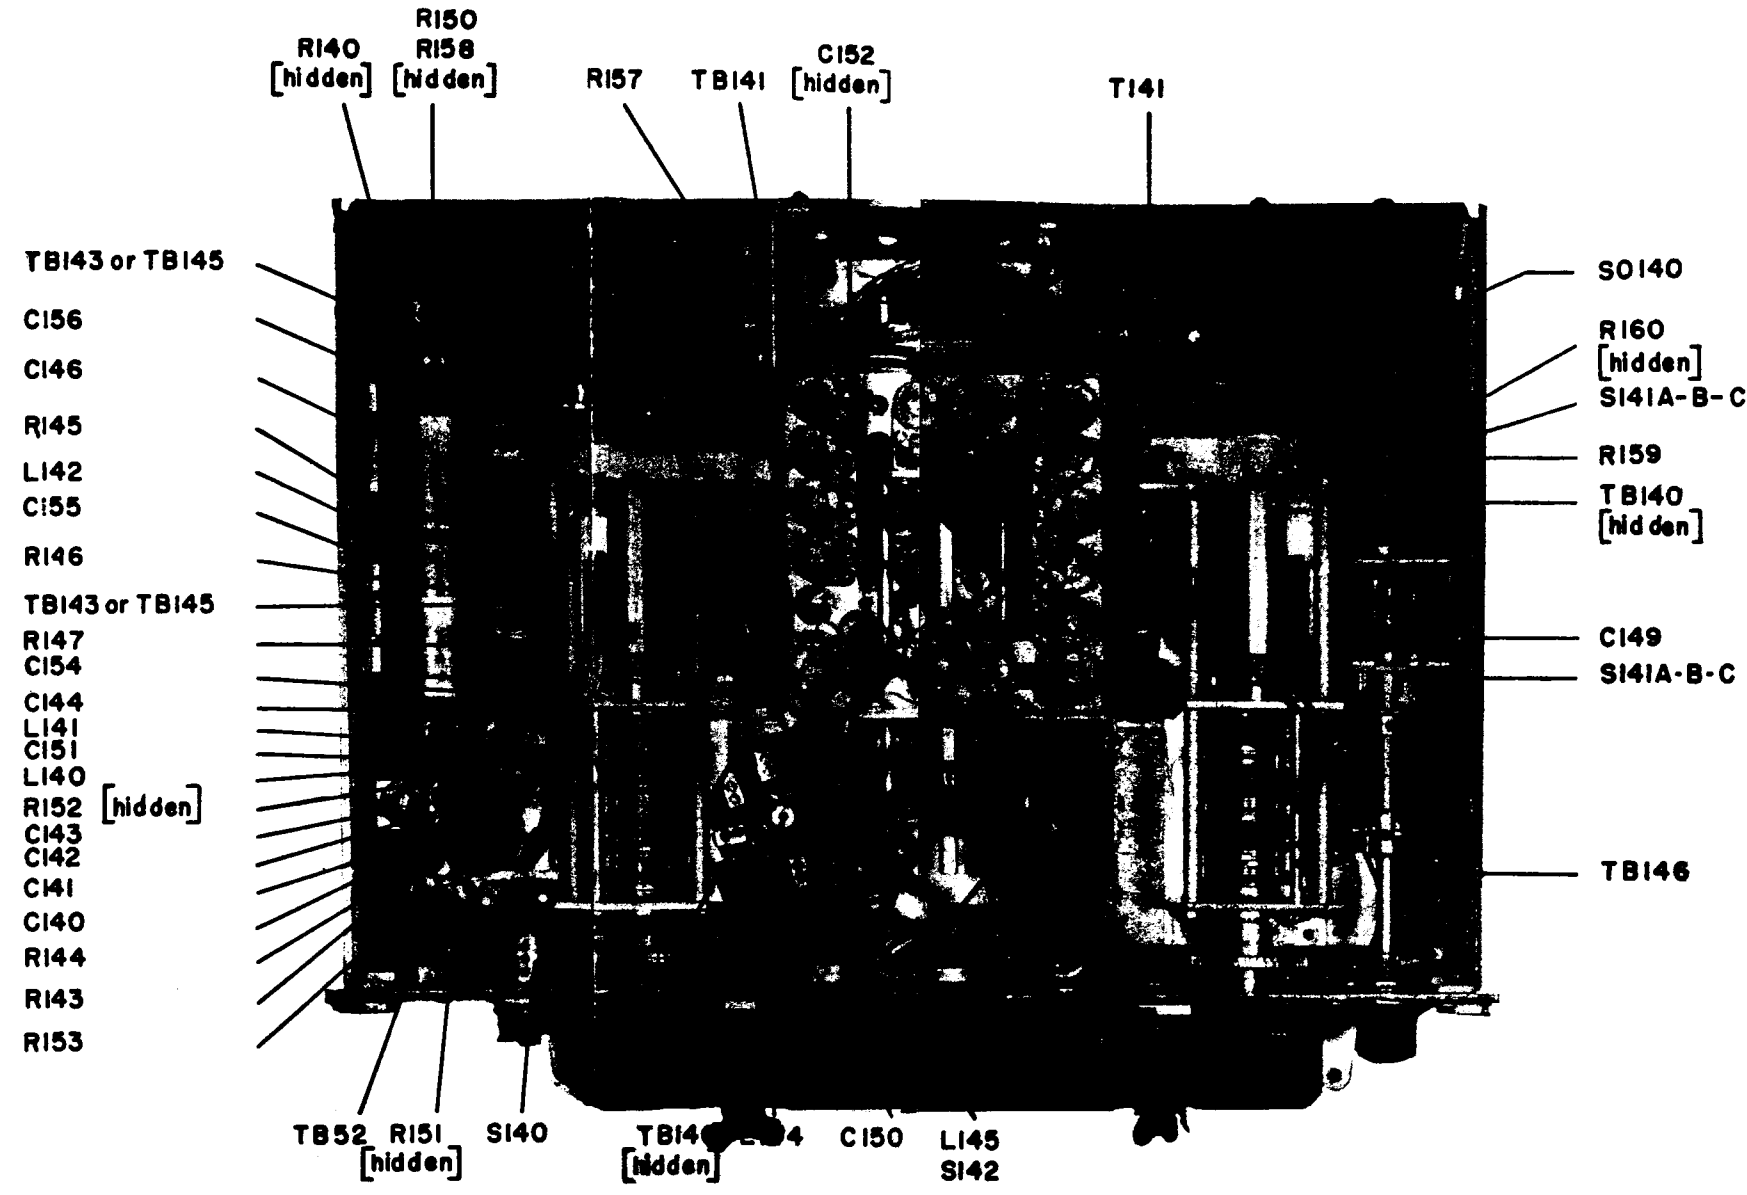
LAYOUT OF COMPONENTS WS Cdn No. 29 (BOTTOM View)
